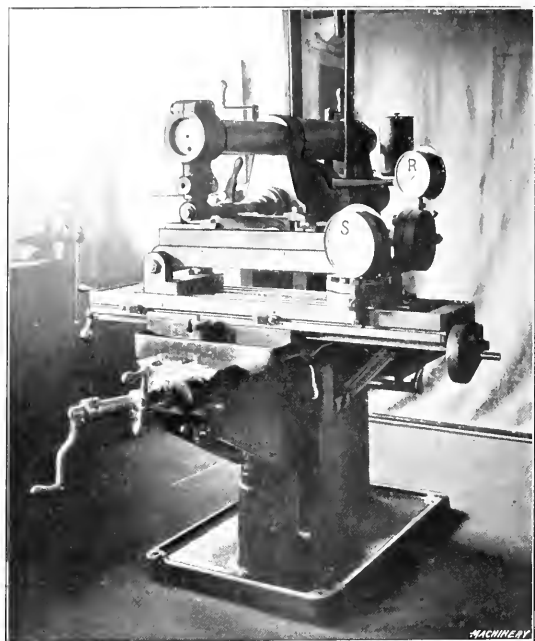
Milling Machine Dynamometer mounted on No. 2 Cincinnati Miller
